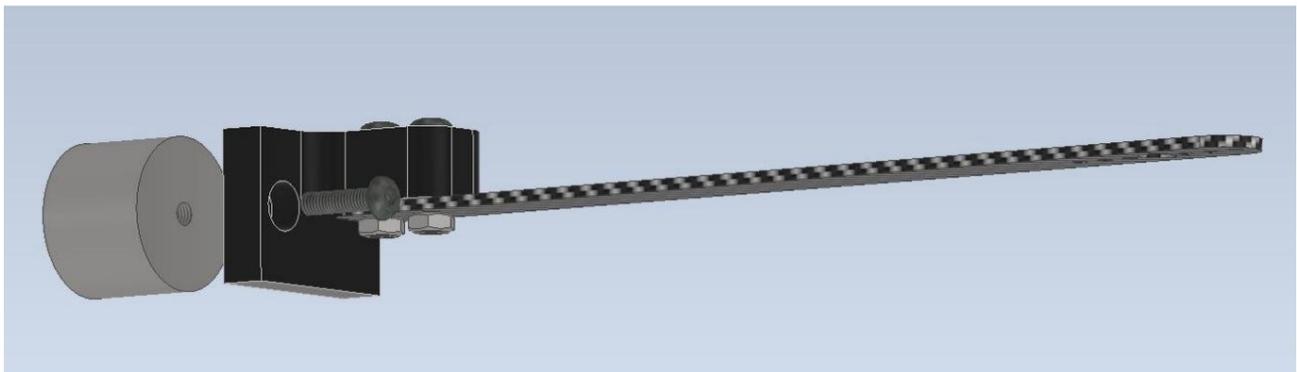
Exploded view of electromagnet rod and electromagnet
